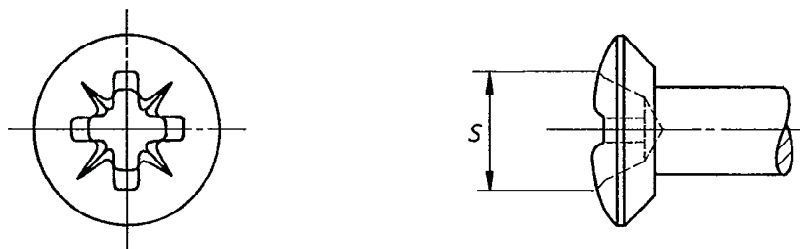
Recessed truncated raised countersunk head machine screws: enlarged views of recess type Z
